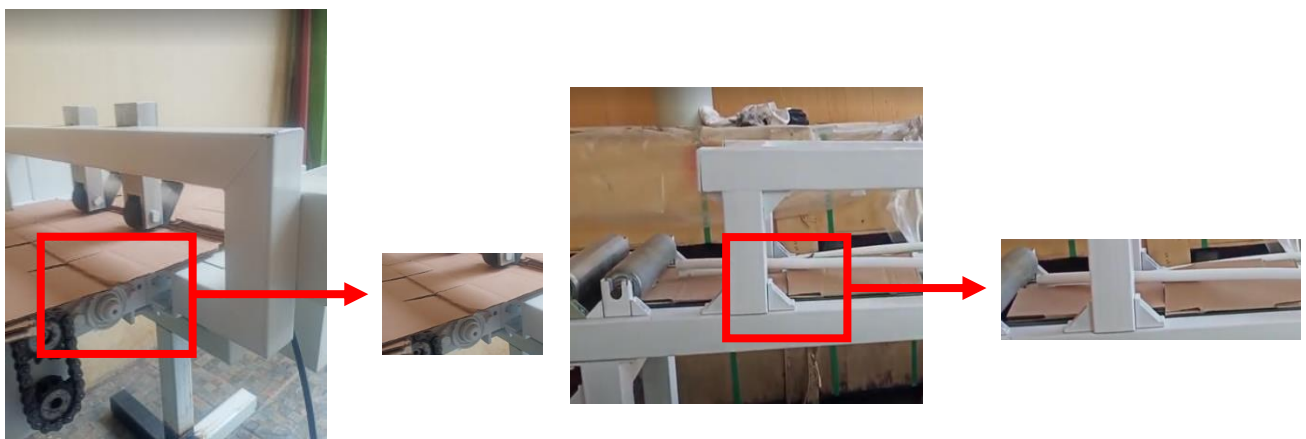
(a) Bottleneck in Friction Mechanism, (b) Bottleneck in Folding Conveyor
